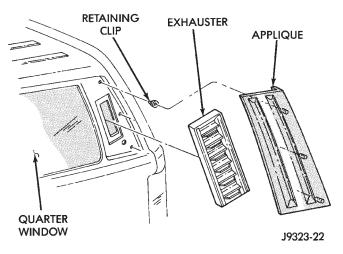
Quarter Window Applique & Air Exhauster INSTALLATION
